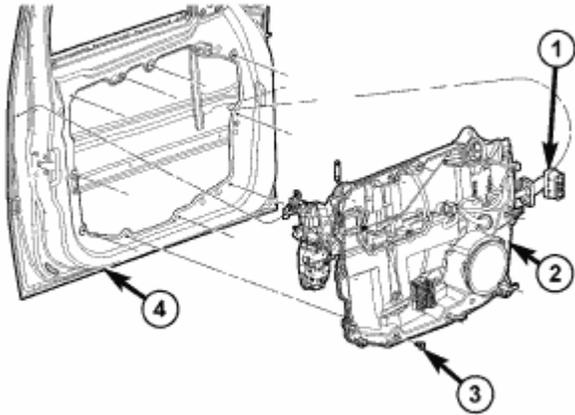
Removing/Installing Door Latch & Latch Bracket Securing Screws
